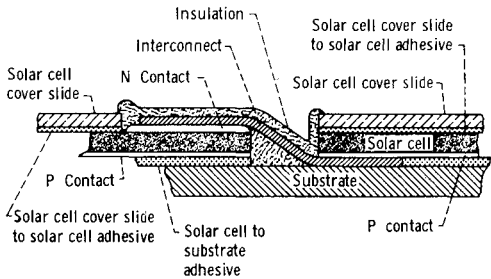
Cross-sectional view of insulated solar cell assembly showing dielectrics.
